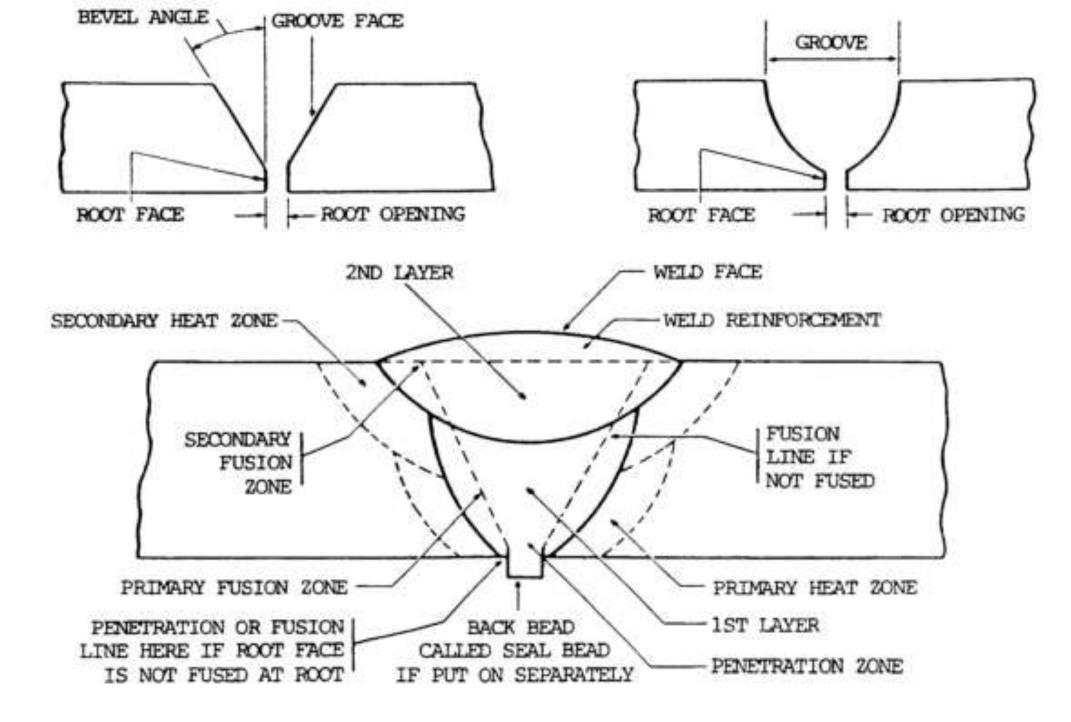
Heat affected zones in a multipass weld.
